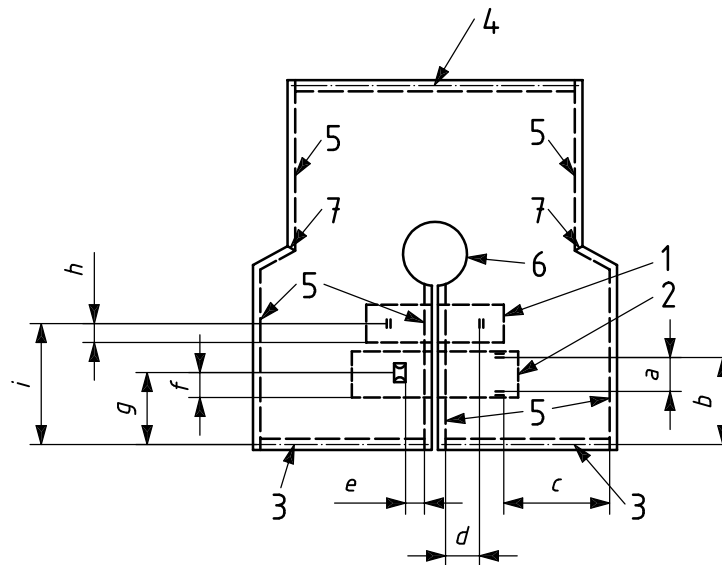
Chest strap assembly (adjustable part left and fixed part right)
